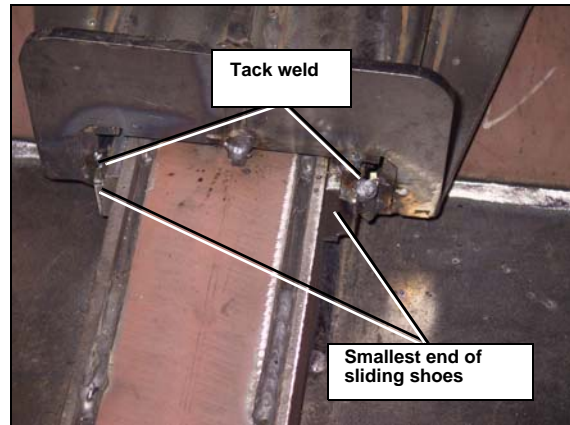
Tack weld the smallest end of the sliding shoes
